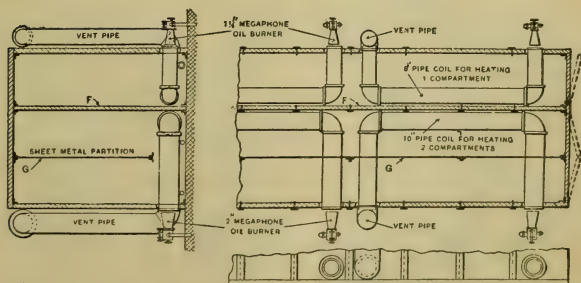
Sectional view of ovens, showing method of installing pipe coils for fuel oil heating.
